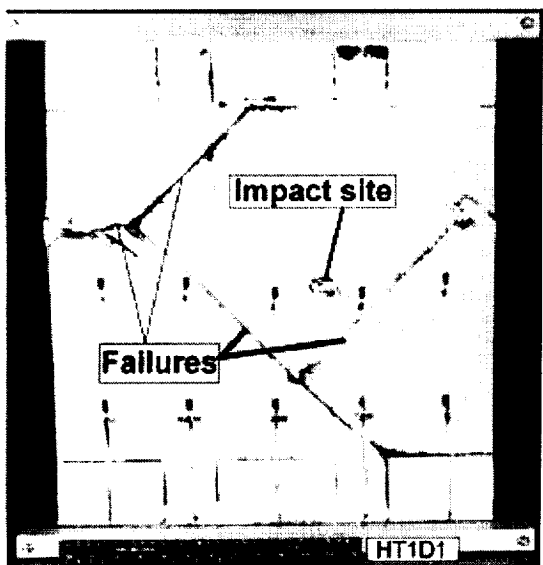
Failure location on skin side of Specimen HT1D1.
